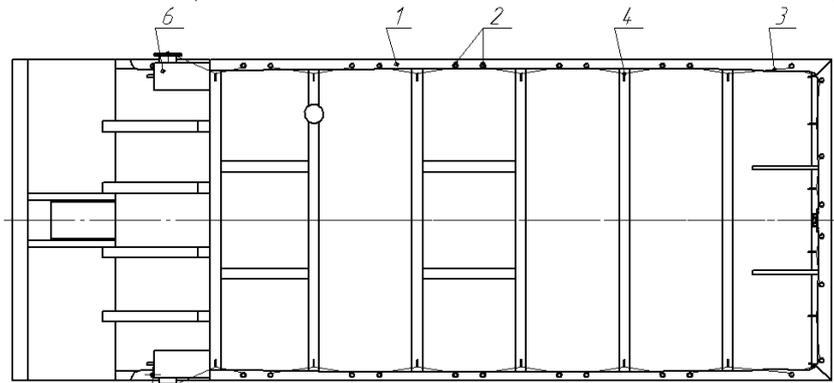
Scheme of stocking cables awning on the bottom of the body
